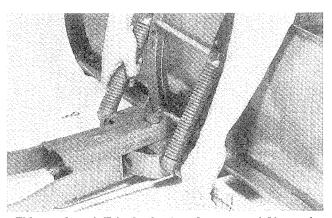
Attach Trip Springs to Sector and Channel Assembly
